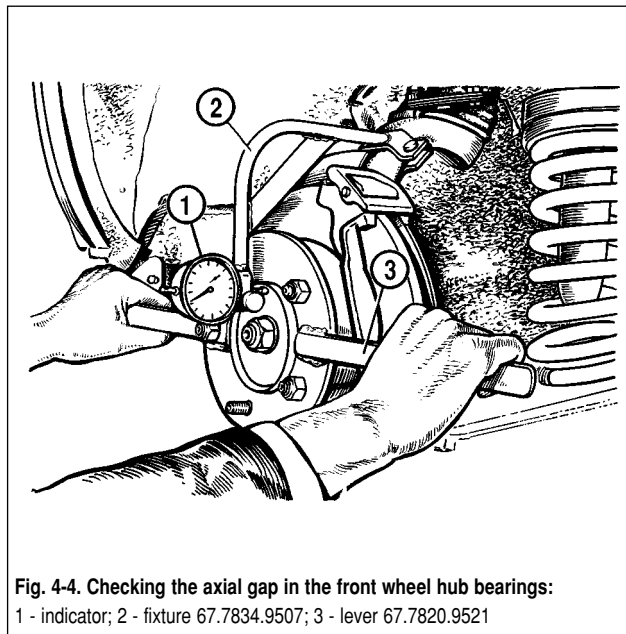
Checking the axial gap in the front wheel hub bearings:
